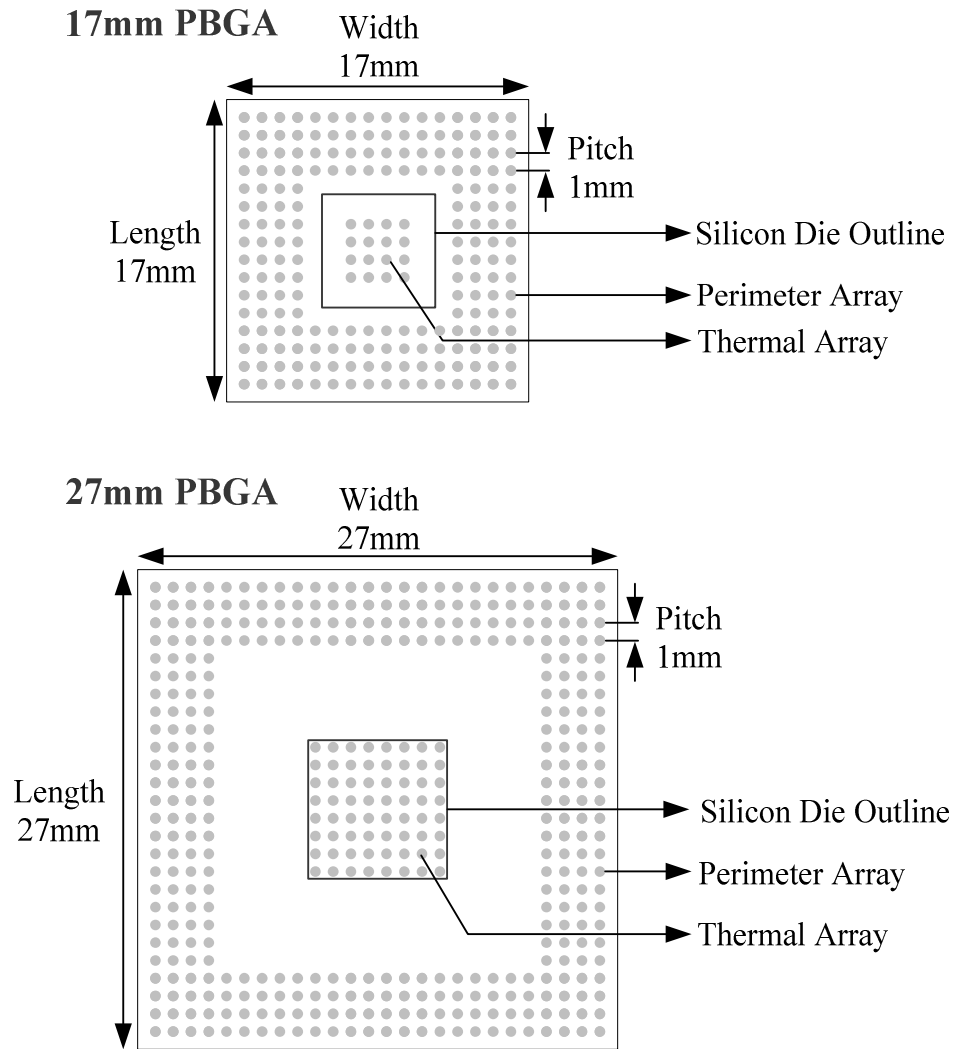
17mm & 27mm PBGA Solder Ball Layout
